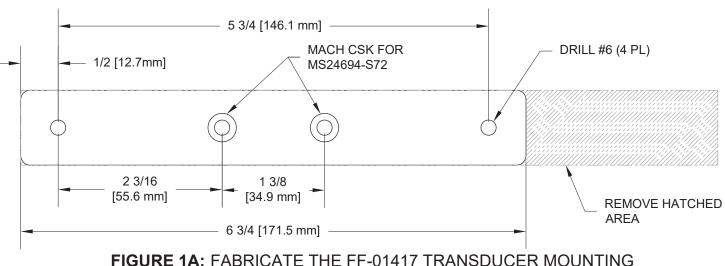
A: FABRICATE THE FF-01417 TRANSDUCER MOUNTING PLATE
